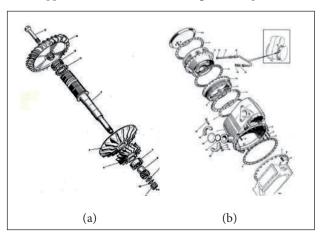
(a) Rotating group (centrifugal compressor and axial turbine), (b) Engine's external parts (casing, seals, ducts, connections etc.).
